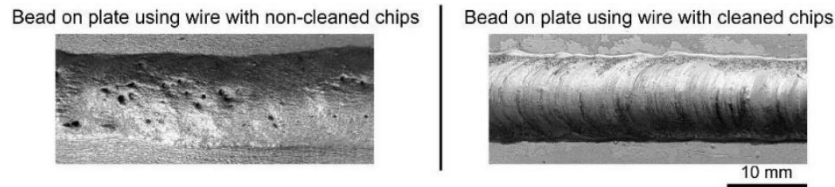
Comparison between bead welded with wire produced without chip cleaning and wire produced with chip cleaning before the FSE process.
